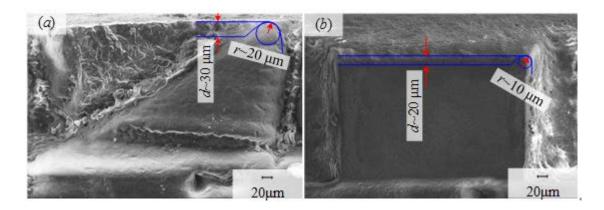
Cutting edge wear of grinding wheel (a) I, and (b) II
